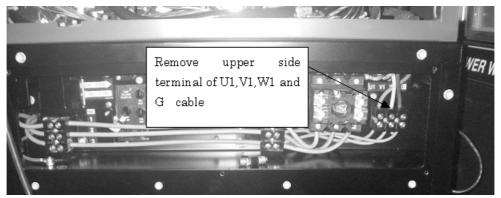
(d) Remove terminal of welding power supply
